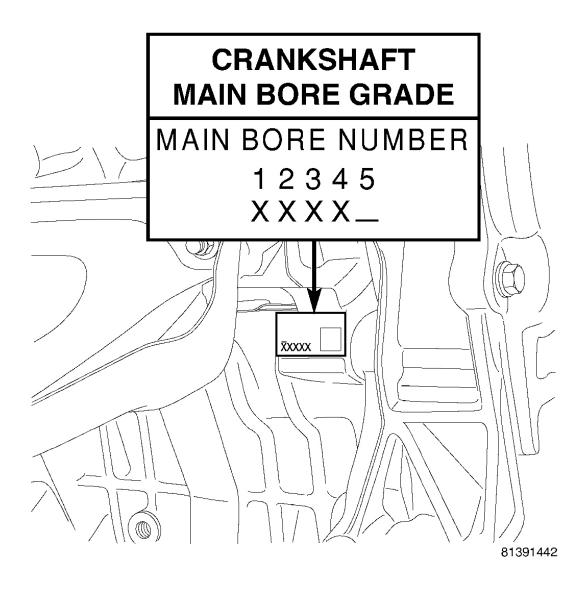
Engine Block Main Bore Grade Courtesy of CHRYSLER LLC
